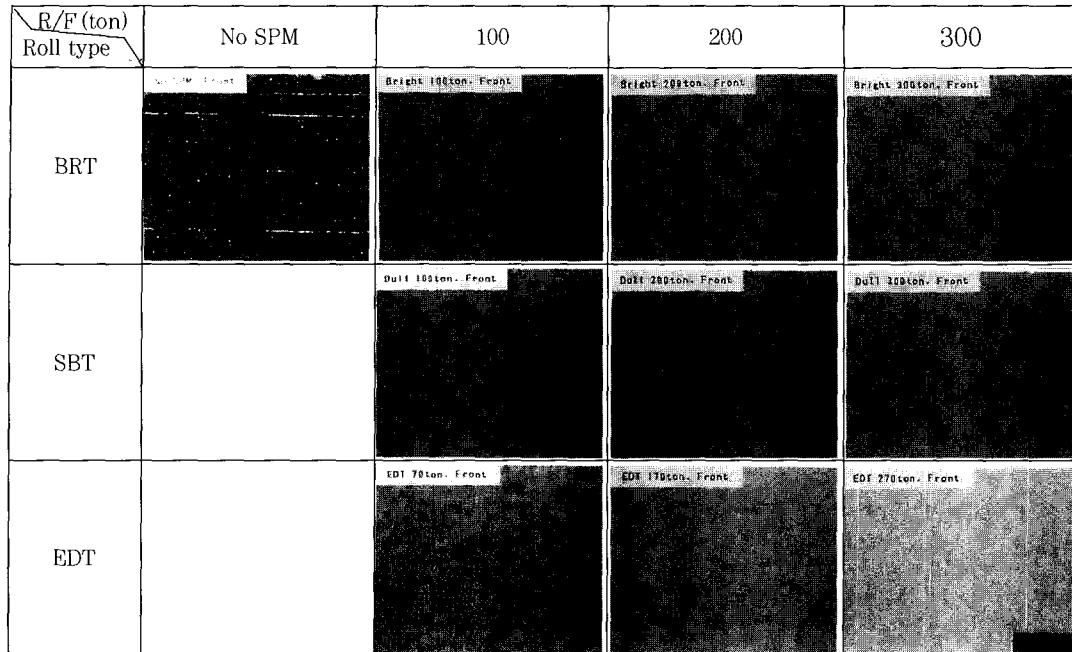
Variation of surface appearance of hot-dip galvanized steel sheets according to roll force and roll type of skin pass mill
